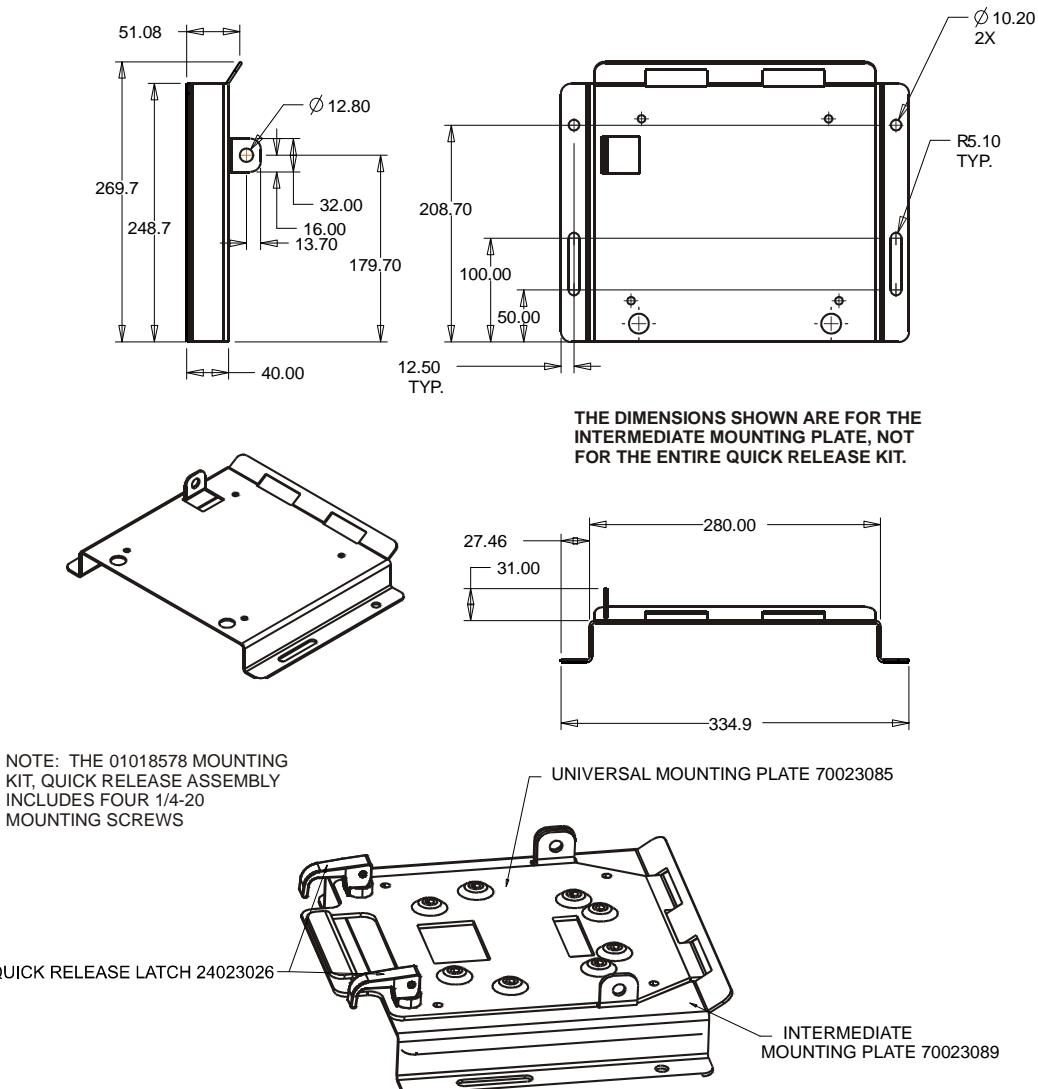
SMART-MR10/15 Mounting Kit, Quick Release Assembly (01018578)
